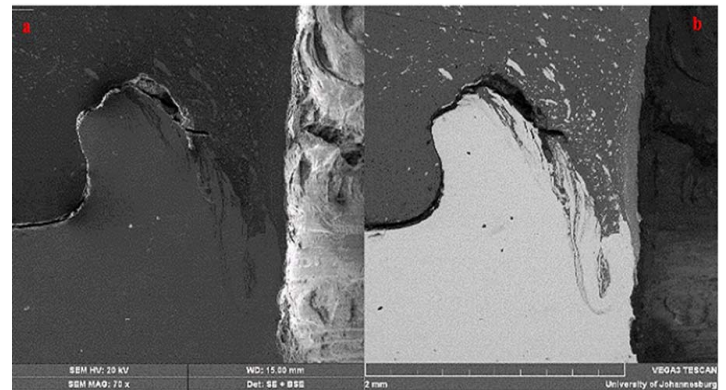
Showing a secondary electron (a) and a backscattered electron (b) images of the spot weld produced at 800 rpm and 0.5 mm plunge depth using a flat pin and a flat shoulder tool.
